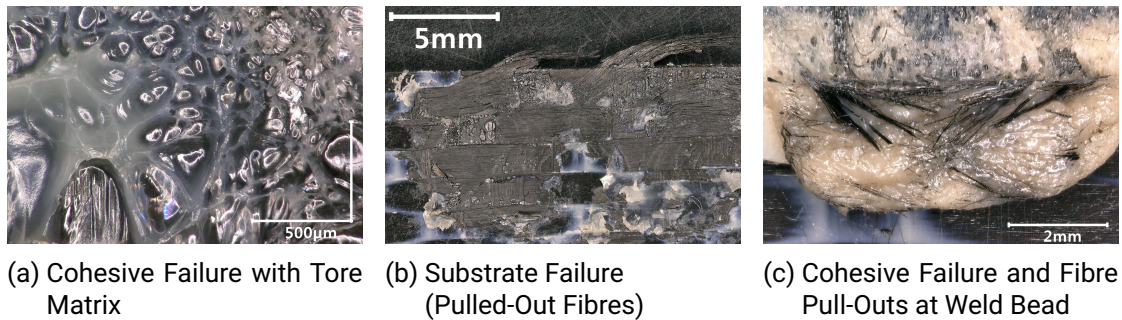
Observed Failure Modes on Fracture Surfaces
